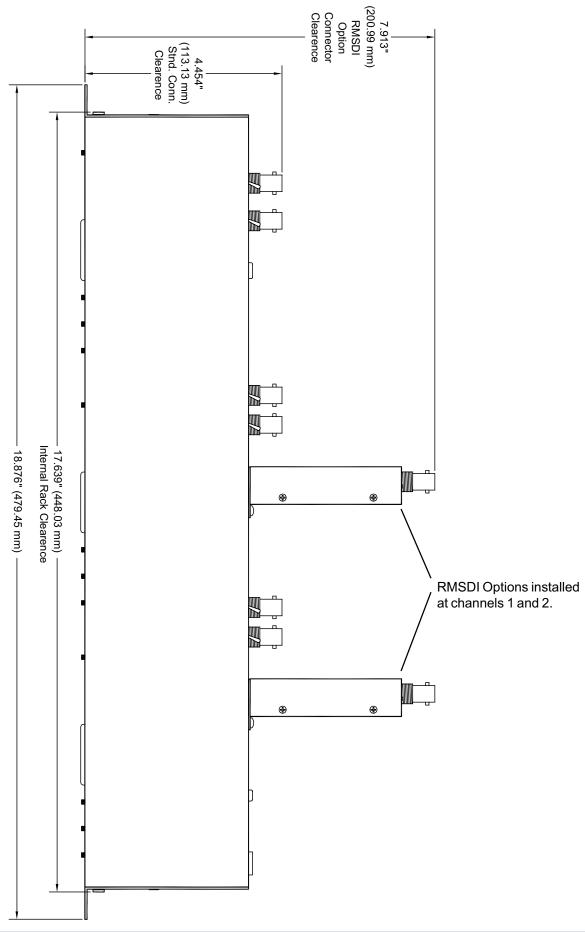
RM-3358W Top View (Depth and Width Clearance Dimensions)
